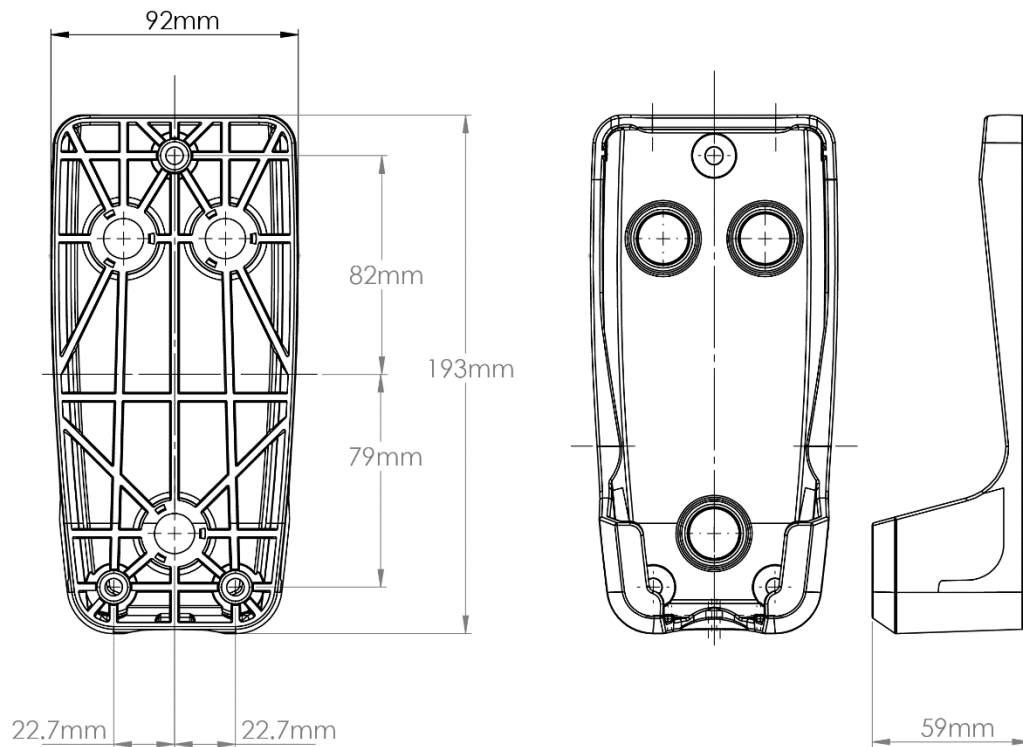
Remote Pendant Cradle Dimensions (mm)
